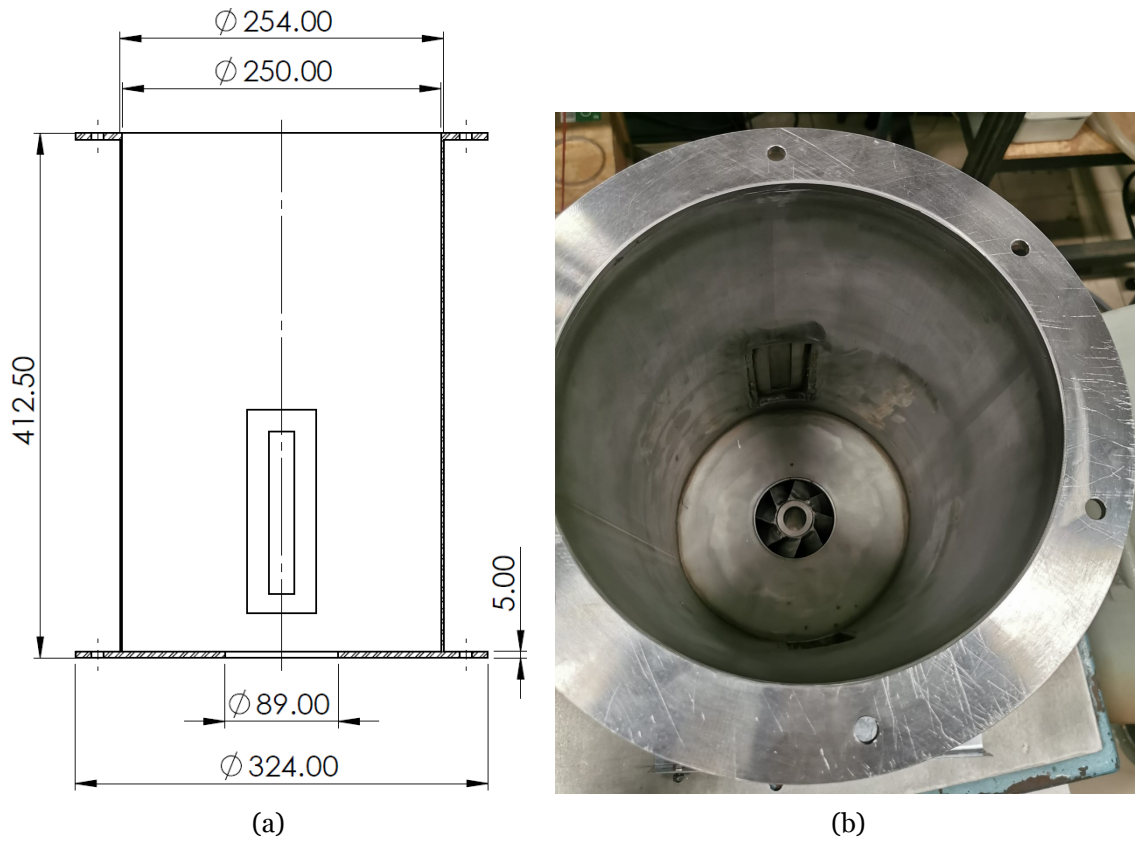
Combustion chamber: a) Technical drawing (units in mm); b) Top view.
